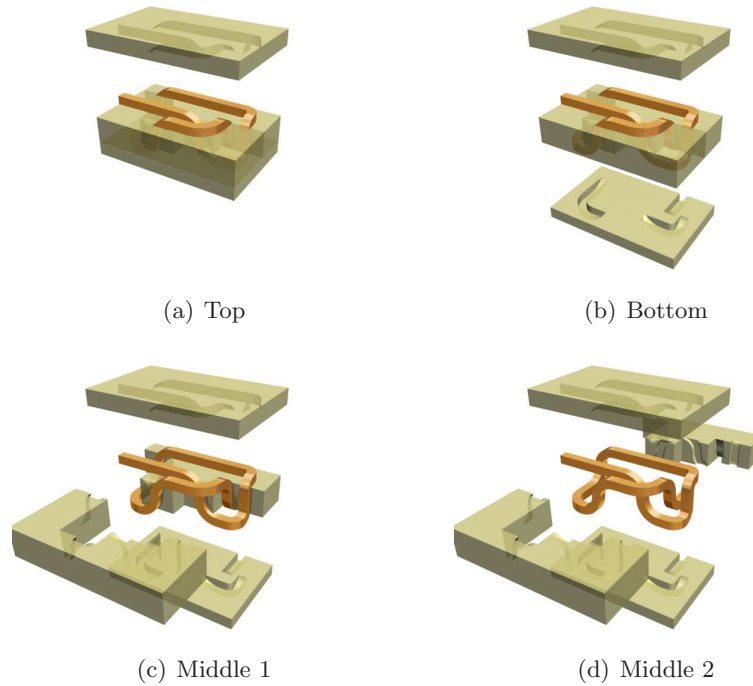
Sequence of steps for taking apart a four-piece fixture
